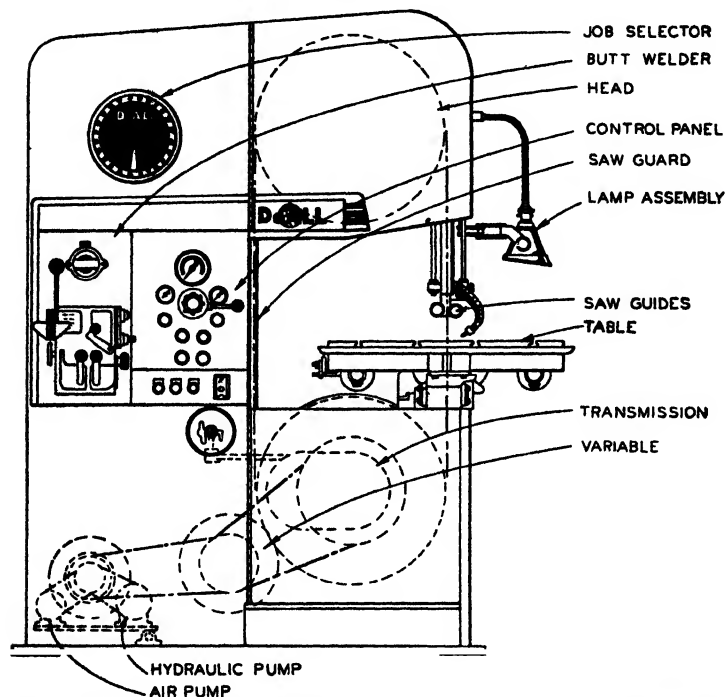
The working parts of the DoAll Contour-matic metal-sawing machine. (The DoAll Company)
